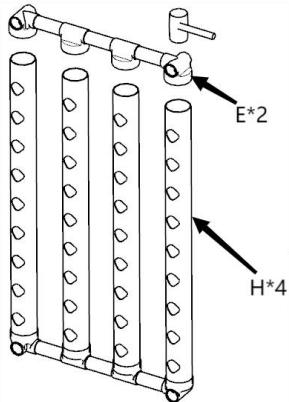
Connect two sets of connector composite tubes and four planting pipelines together according to the diagram, with the planting pipelines facing upwards. Reinforce them with a rubber hammer (strike each connection with the rubber hammer until they fit tightly)
